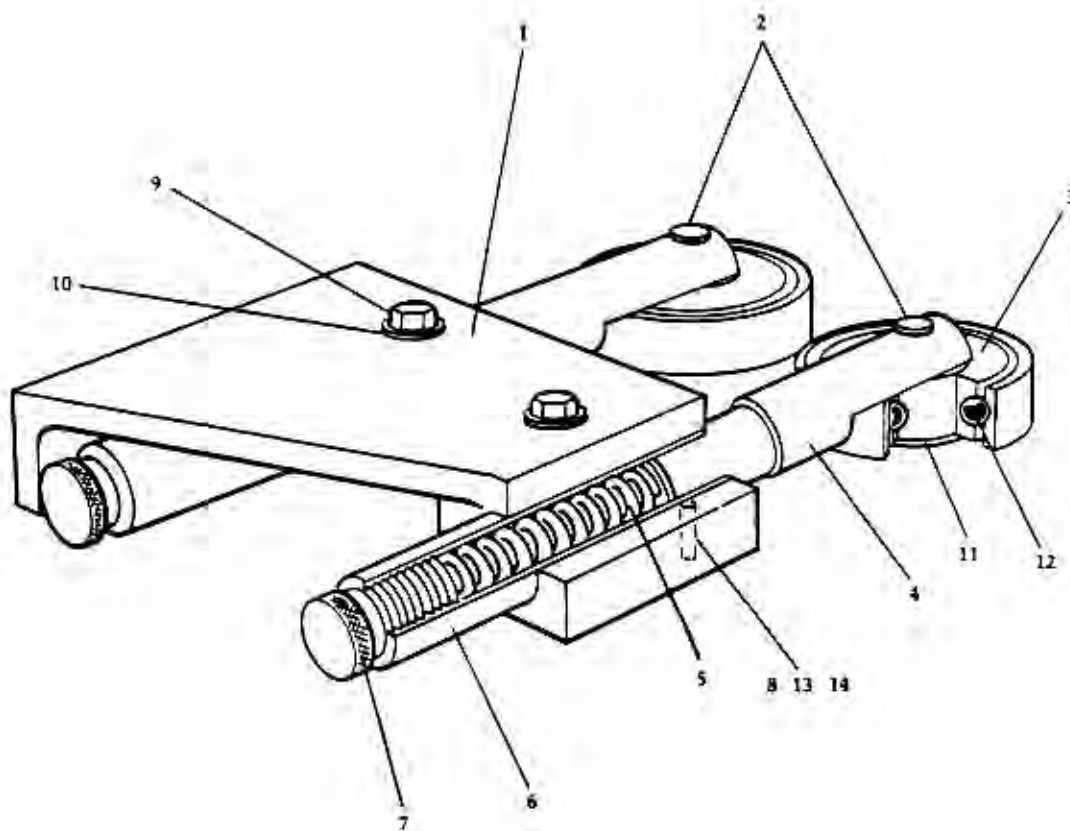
DOUBLE SIDE ROLLER PRESSURE UNIT
